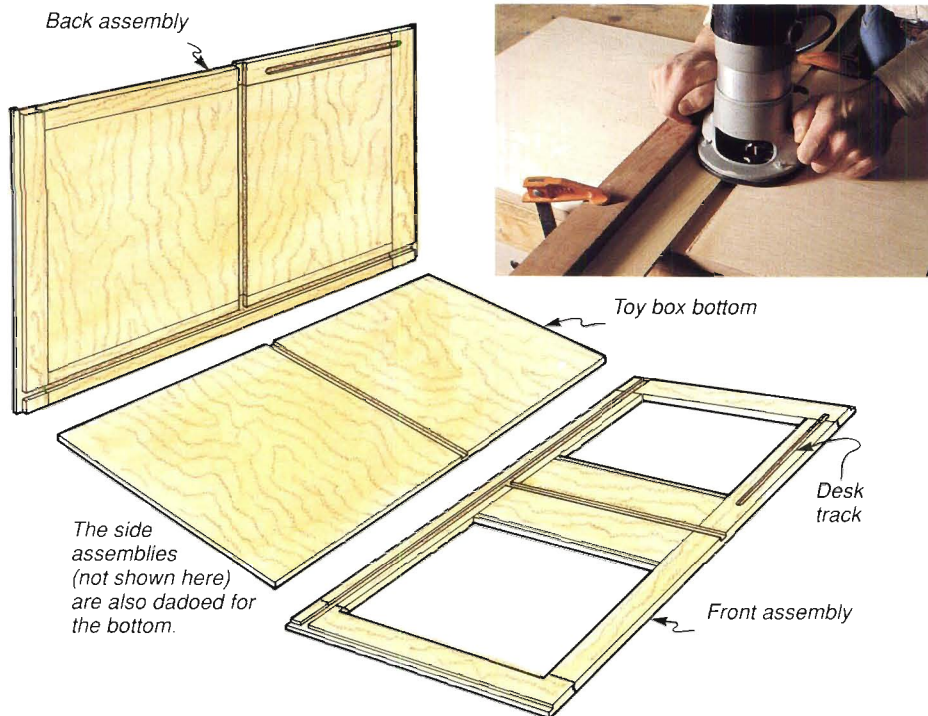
Use a router with a 3/4" mortising bit and a straight edge jig to rout dados in all four walls for holding the bottom panel and in the front wall, back wall and bottom for the center divider.
